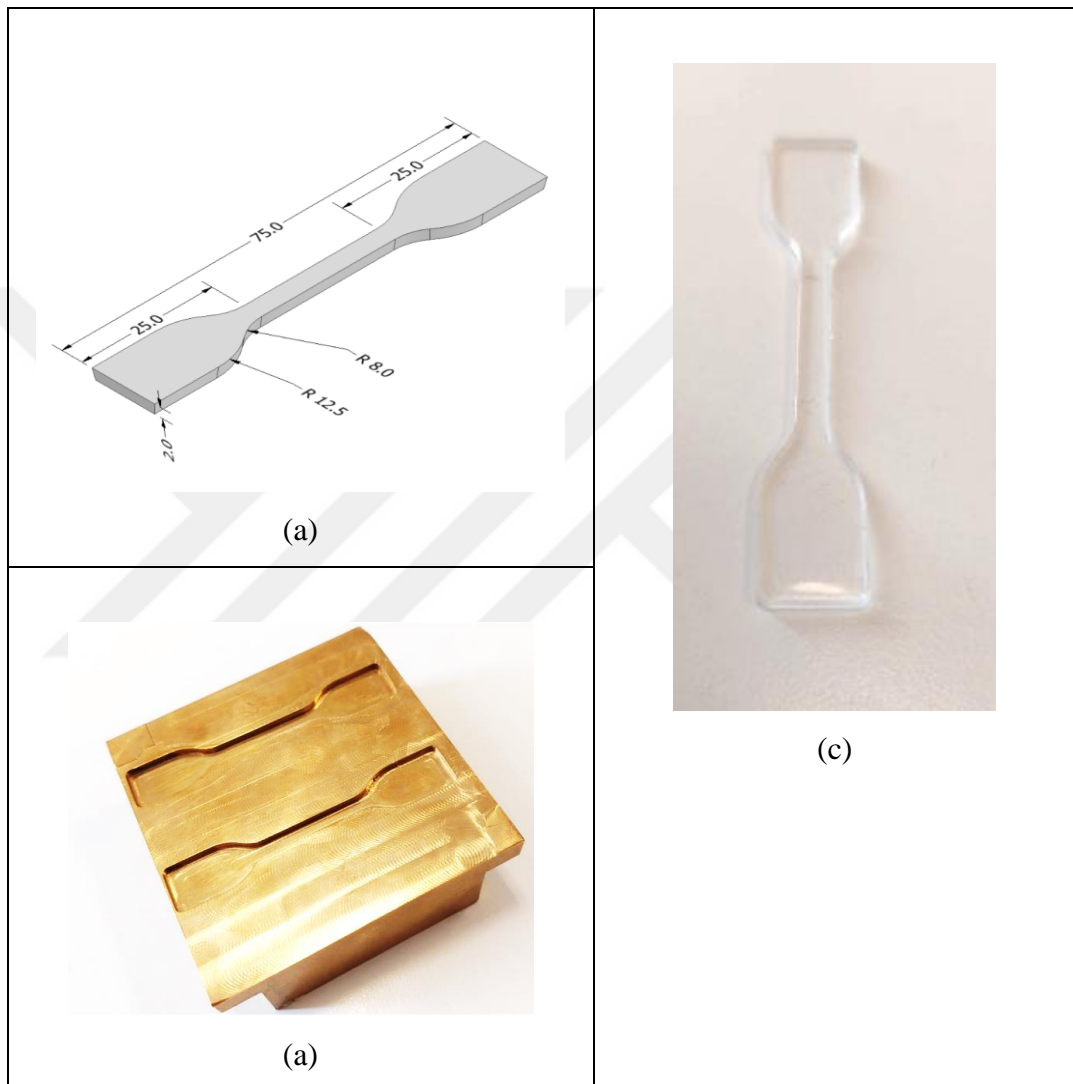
(a) The solid model of the tensile test specimen, (b) The mold used for casting the PDMS specimen, (c) de-molded PDMS tensile specimen.
